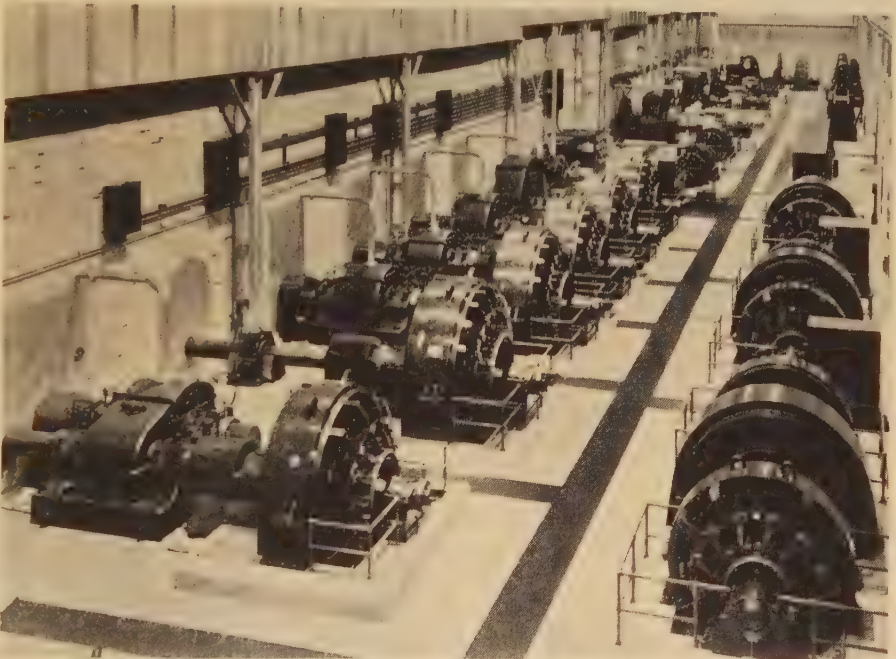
General view of motor room of hot-strip mill illustrated in figure 1
